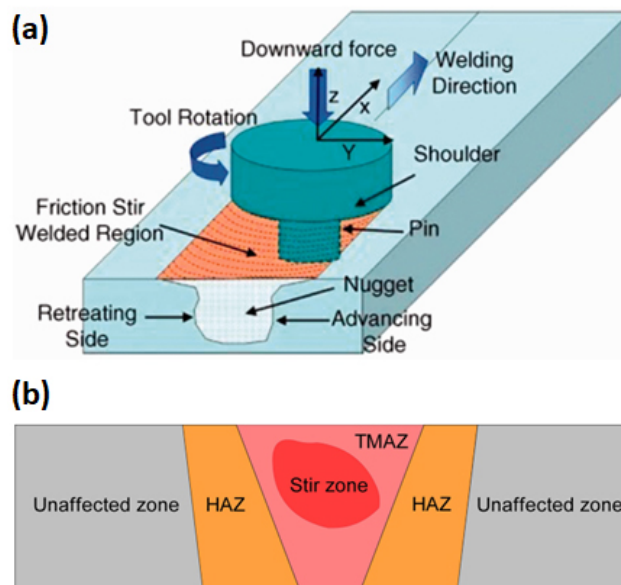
Schematic of (a) friction stir welding process (reproduce from [14]) and (b) different zones: stir zone (SZ), Thermo-mechanical affected zone (TMAZ), Heat affected zone (HAZ) and un-affected zone in the welded component (redrawn from [15]).
